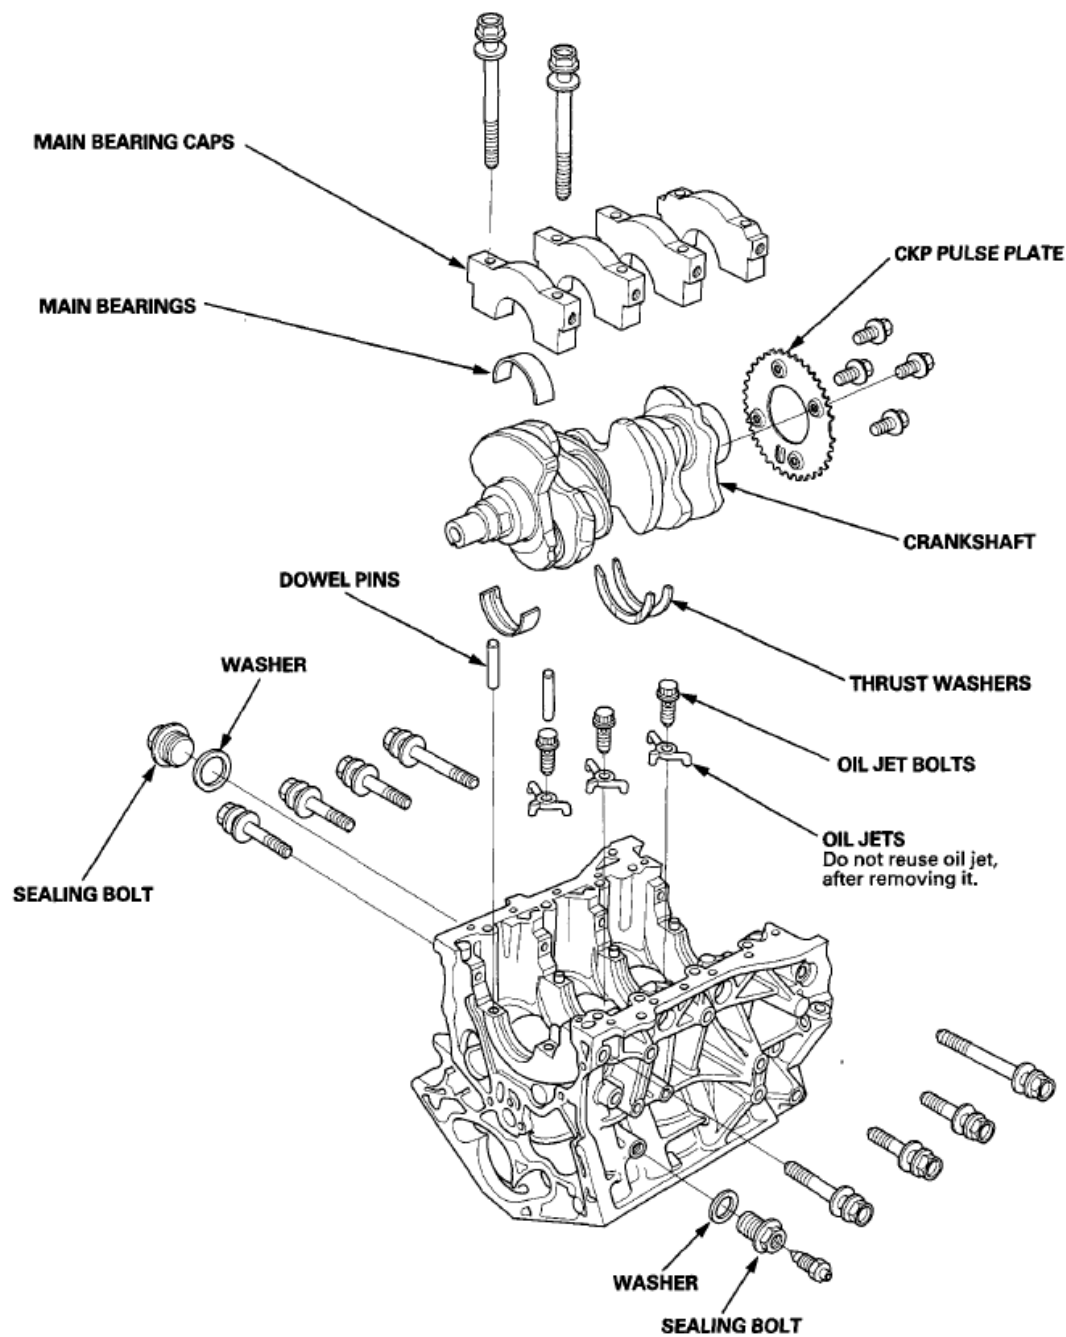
Exploded View Of Engine Block Components (2 Of 3)
